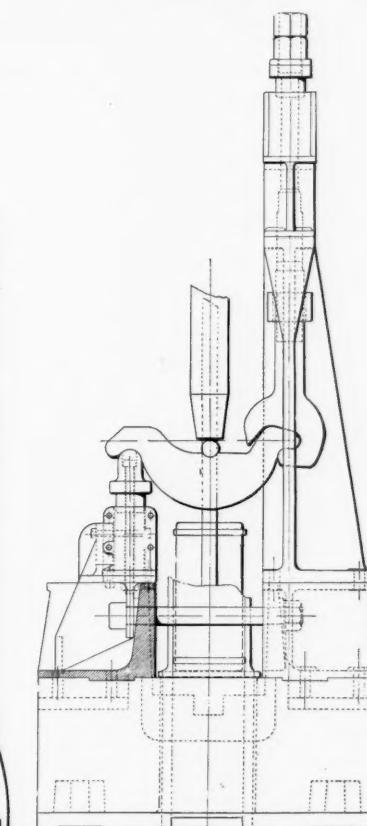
General Arrangement of Proposed Jerk Test Machine.
